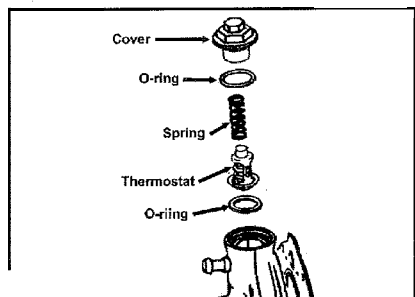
Exploded view of the thermostat assembly-FICHT 200-250 hp (3000/3300cc) 90LV6 motors
